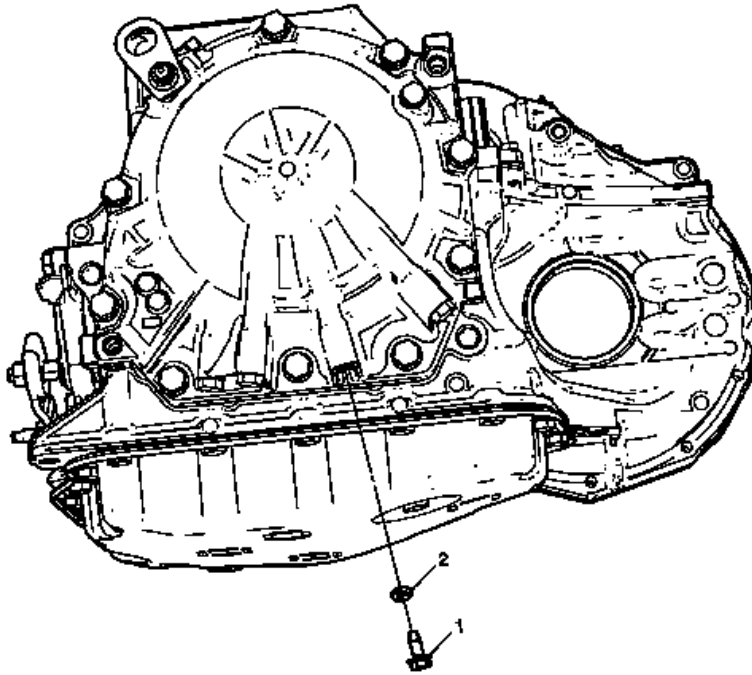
Automatic Transmission Fluid Pressure Test Hole Plug
